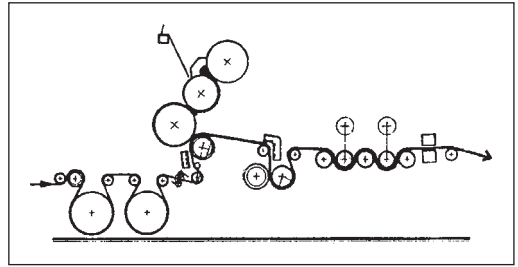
Saueressig melt coating with roller grinding mill (above) and fabric path (below).
